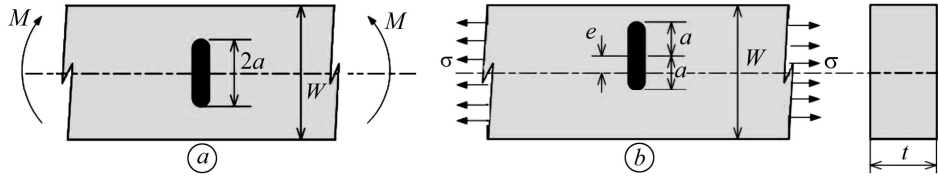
Defect I: finite width plate containing two-dimensional centered cracks under bending (a) and defect II: finite width plate containing two-dimensional eccentric cracks under uniform tension (b): $2a$ – crack length; t – plate thickness; W – plate width; M – bending moment; e – crack eccentricity; σ – tension.
